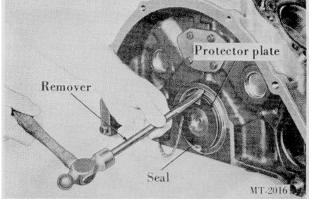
Piercing Seal Retainer Using SE-1941-1 Remover
